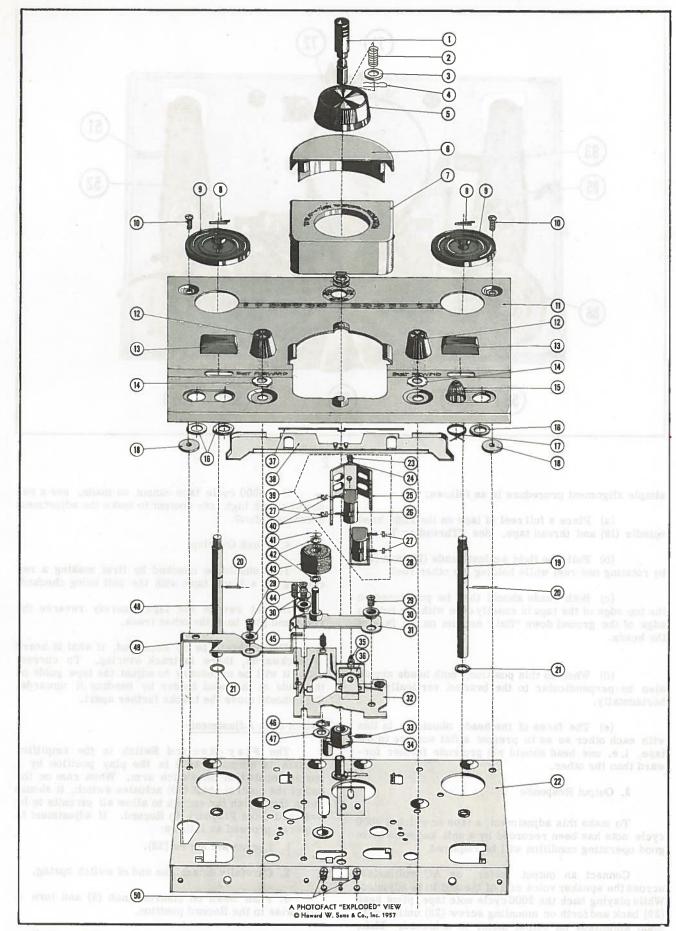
A. EXPLODED VIEW OF PARTS ABOVE BASEPLATE.
